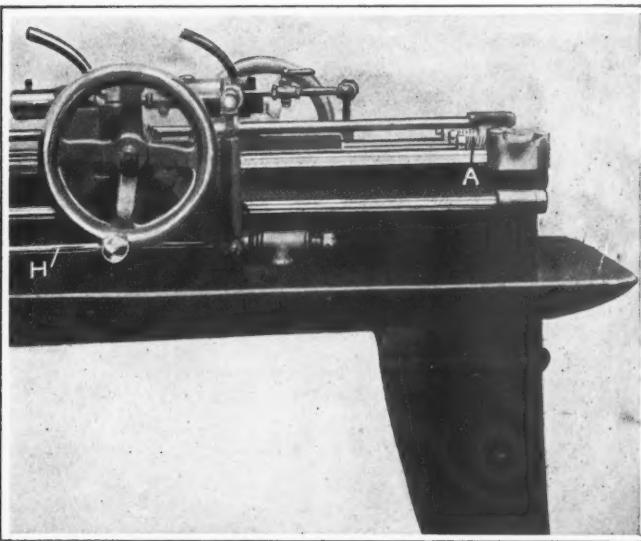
Tail End of Machine, showing Tailstock Buffer Springs
